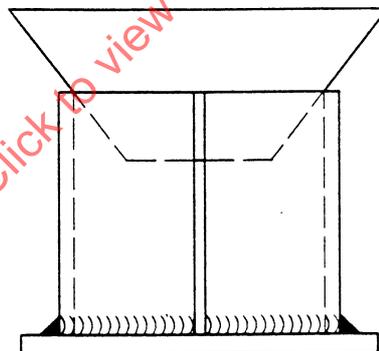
Preparation and fracture testing of test specimens for a fillet weld on pipe
